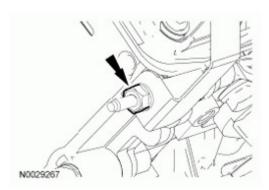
Locating Oil Level Indicator Tube And Bolt Courtesy of FORD MOTOR CO.
